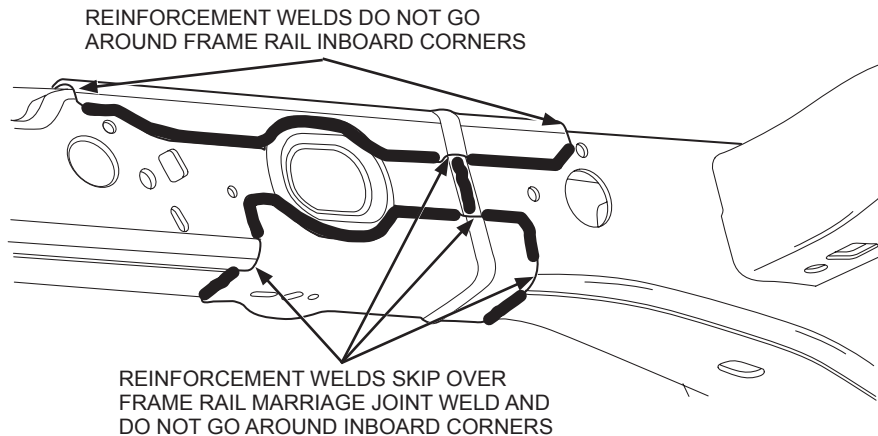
VIEW OF REAR RAIL REINFORCEMENTS INSTALLED, LH INNER SHOWN, RH IS SYMMETRICALLY OPPOSITE
